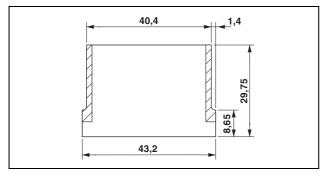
Dimensions of the PCB with housing cover ME-IO 18,8 C 4U 7035
